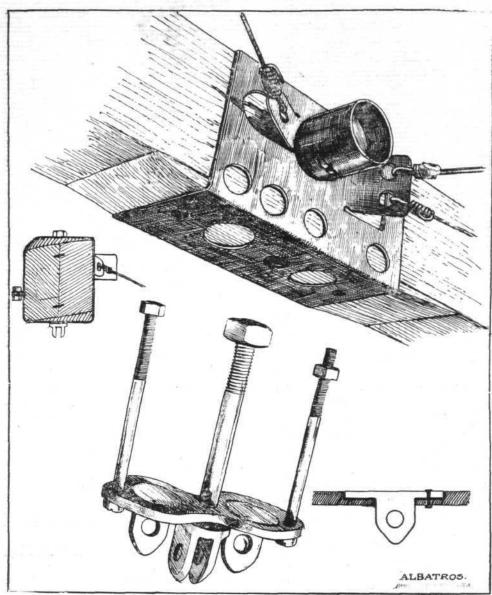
Sheet steel' spar box and socket for compression tube of the upper plane of the Albatros biplane. The bottom sketch shows the attachment of the terminals for the interplane cables and struts.
